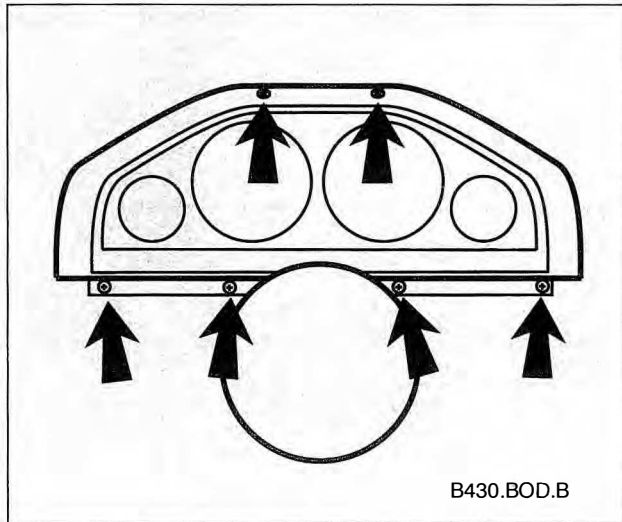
Instrument cluster trim plate retaining screws (arrows) to be removed.
